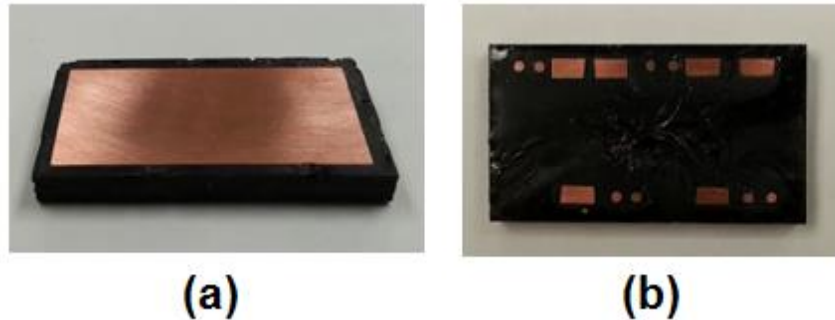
GaN-based MCM encapsulated in epoxy material: (a) top Cu surface for direct heat sink attachment; (b) pin-terminals for surface-mount on the PCB substrate
